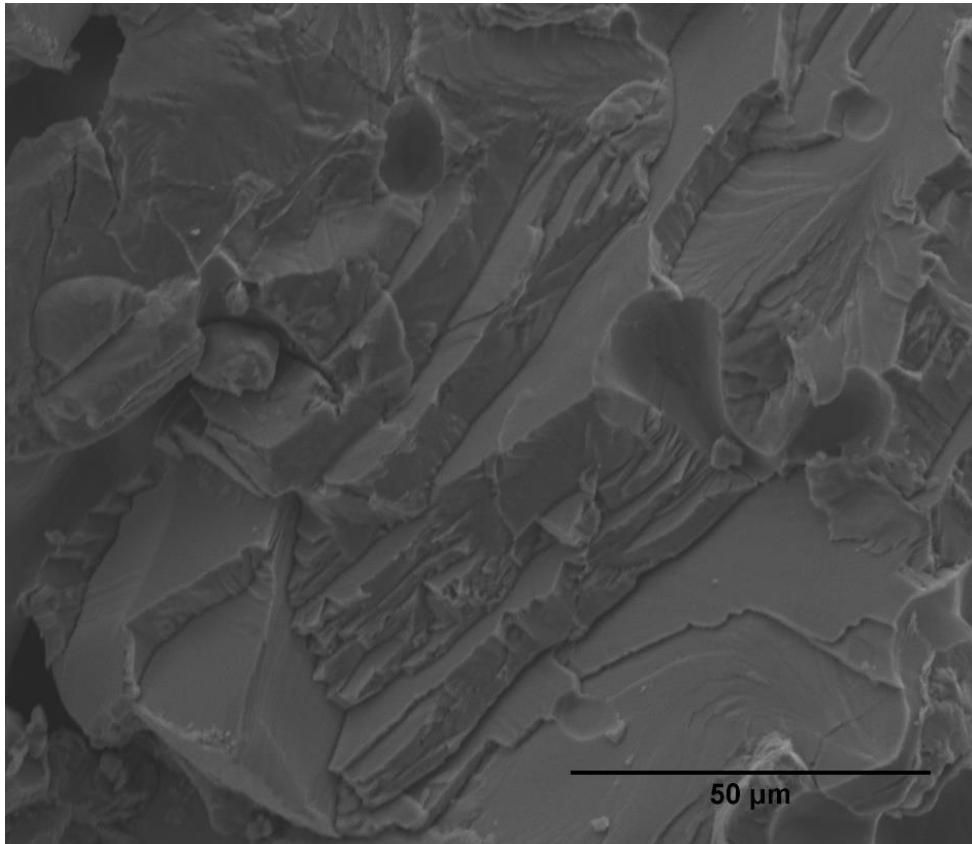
Ti-A fracture surface exhibiting cleavage fracture
